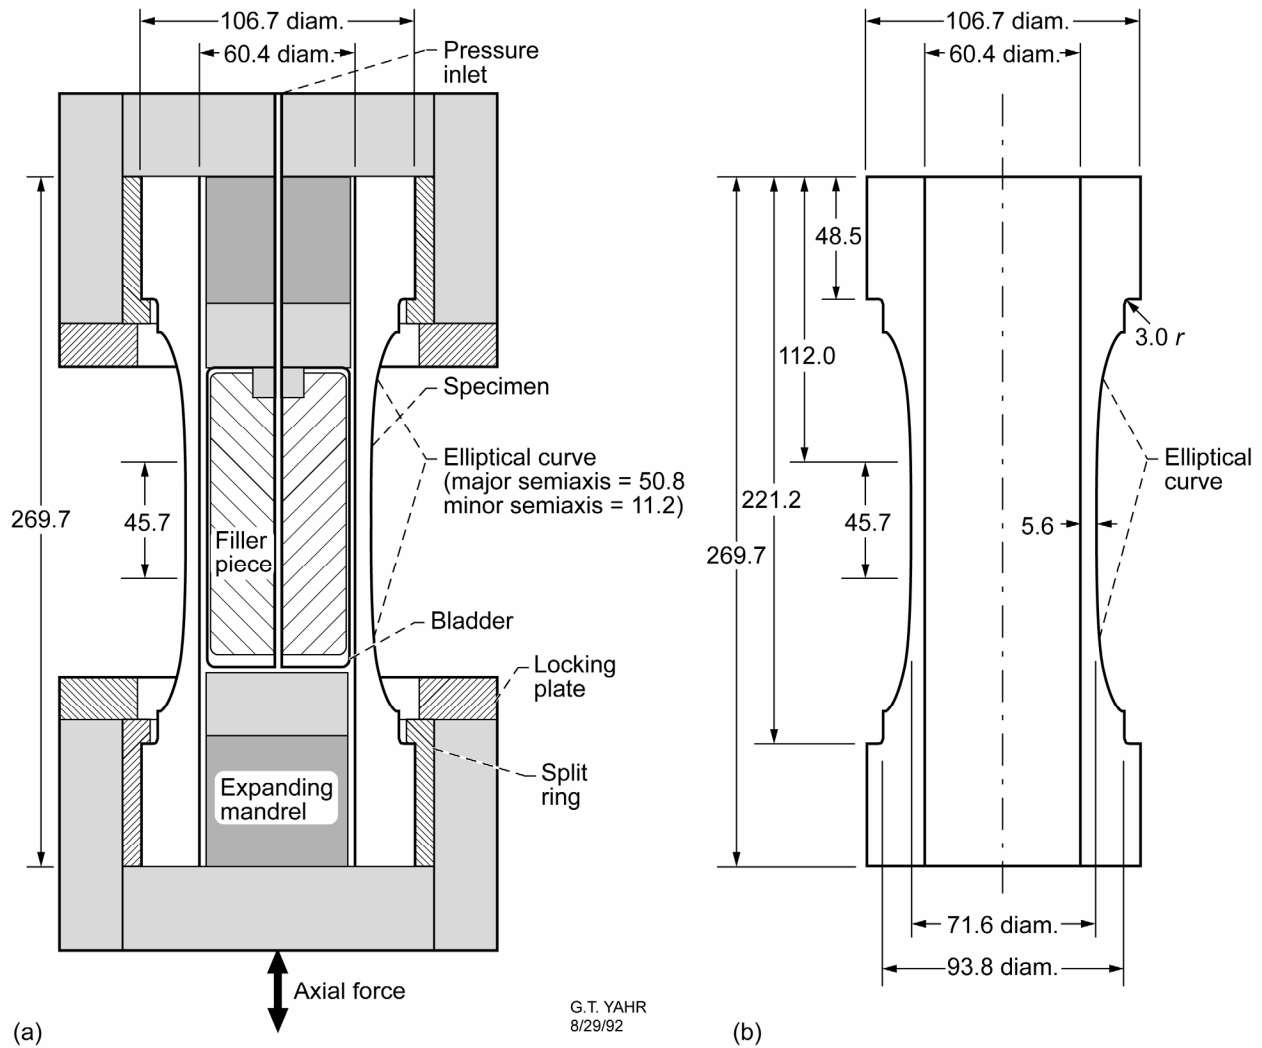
Oak Ridge National Laboratory multiaxial specimen. (a) Cross section of specimen and grip system. (b) Cross section of specimen. (Dimensions are in millimeters.)
